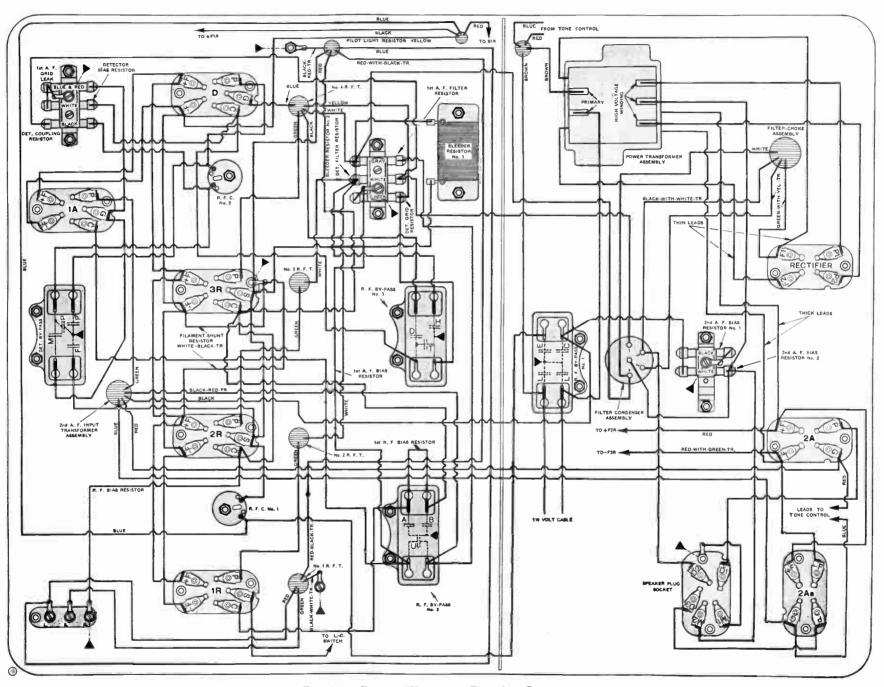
Bottom Wiring of Type L-1 Chassis.
